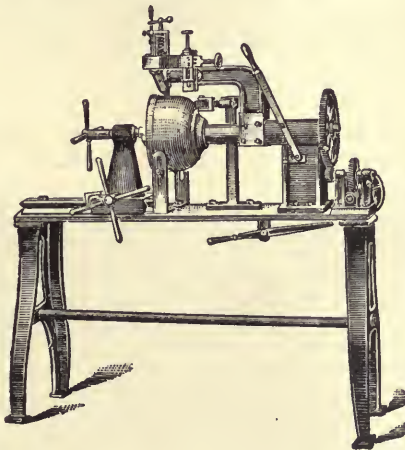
Machine for welding repetition articles (Bastian type).
